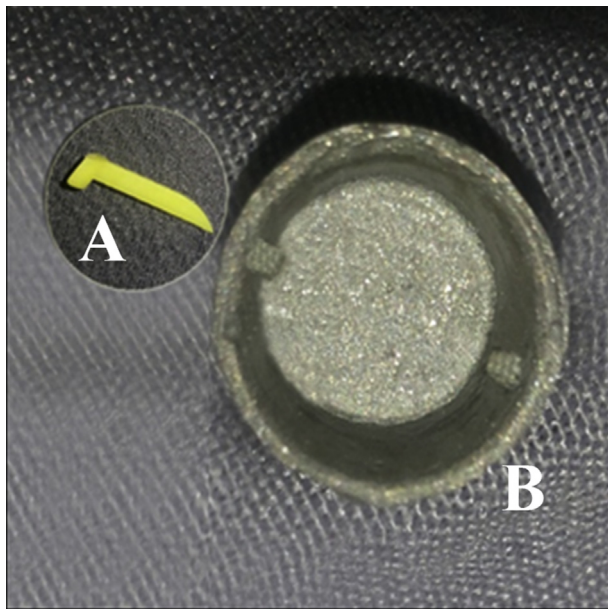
The Duralay pin and the protrusion inside the casting. A: The Duralay pin, and B: The two metal protrusions inside the casting from (Gr. 4; FM).
